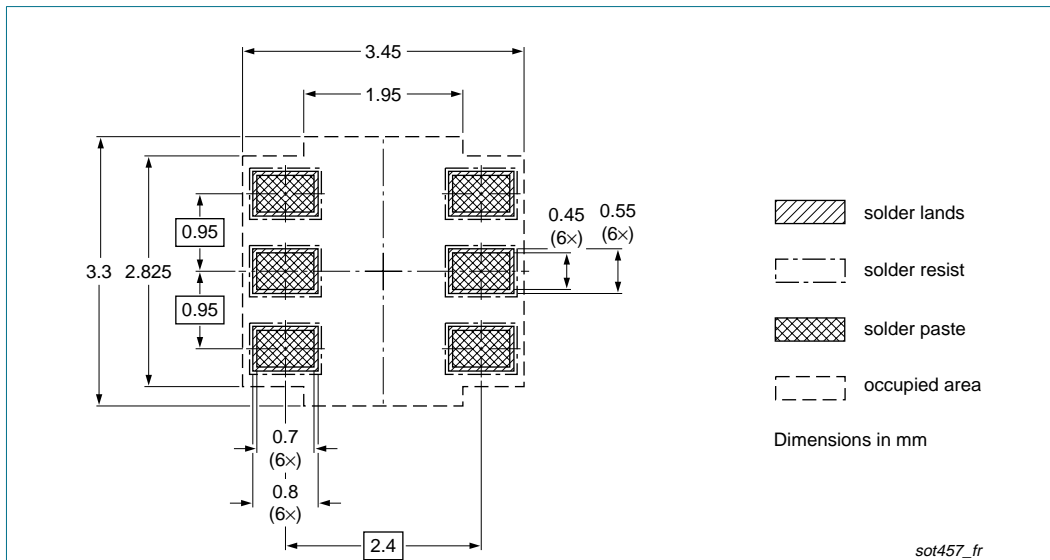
Reflow soldering footprint SOT457 (SC-74)
